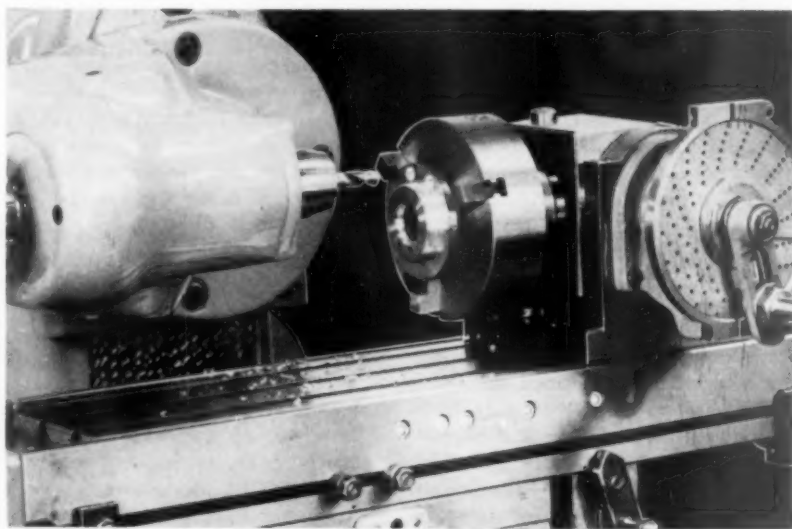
, showing a plain swiveling type of vertical milling head, here set in horizontal plane for drilling and boring a chuck mounted workpiece. The attachments, as well as the miller, are high-precision tools.
